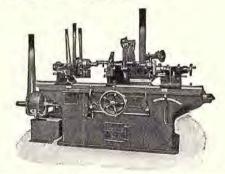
A. Landis 4-A special grinding machine grinds semifinished pistons to exactly fit the bore. Grinds pistons, piston pins, crankshafts, etc., but not cylinders and cams on camshafts. This machine has a capacity of 16" swing and 66" between centers.
